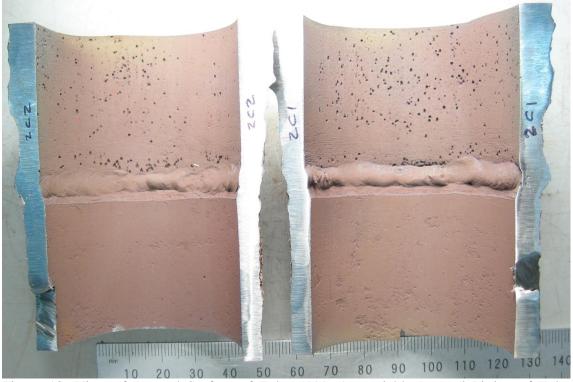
View of Internal Surface of Tube #111. Appreciable Internal Pitting of Tube Segment Above Circ. Weld Was Noted.
